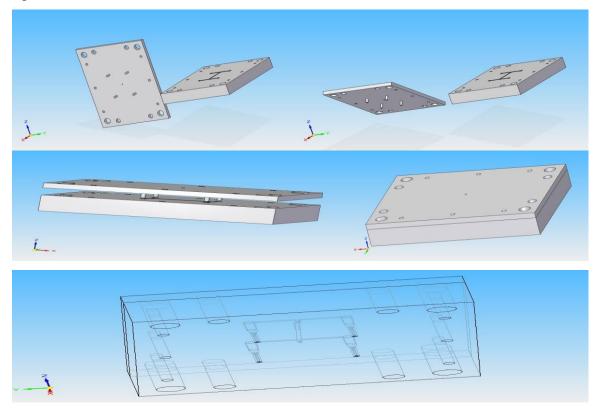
The assembly regarding the sample A, core plate and cavity plate
